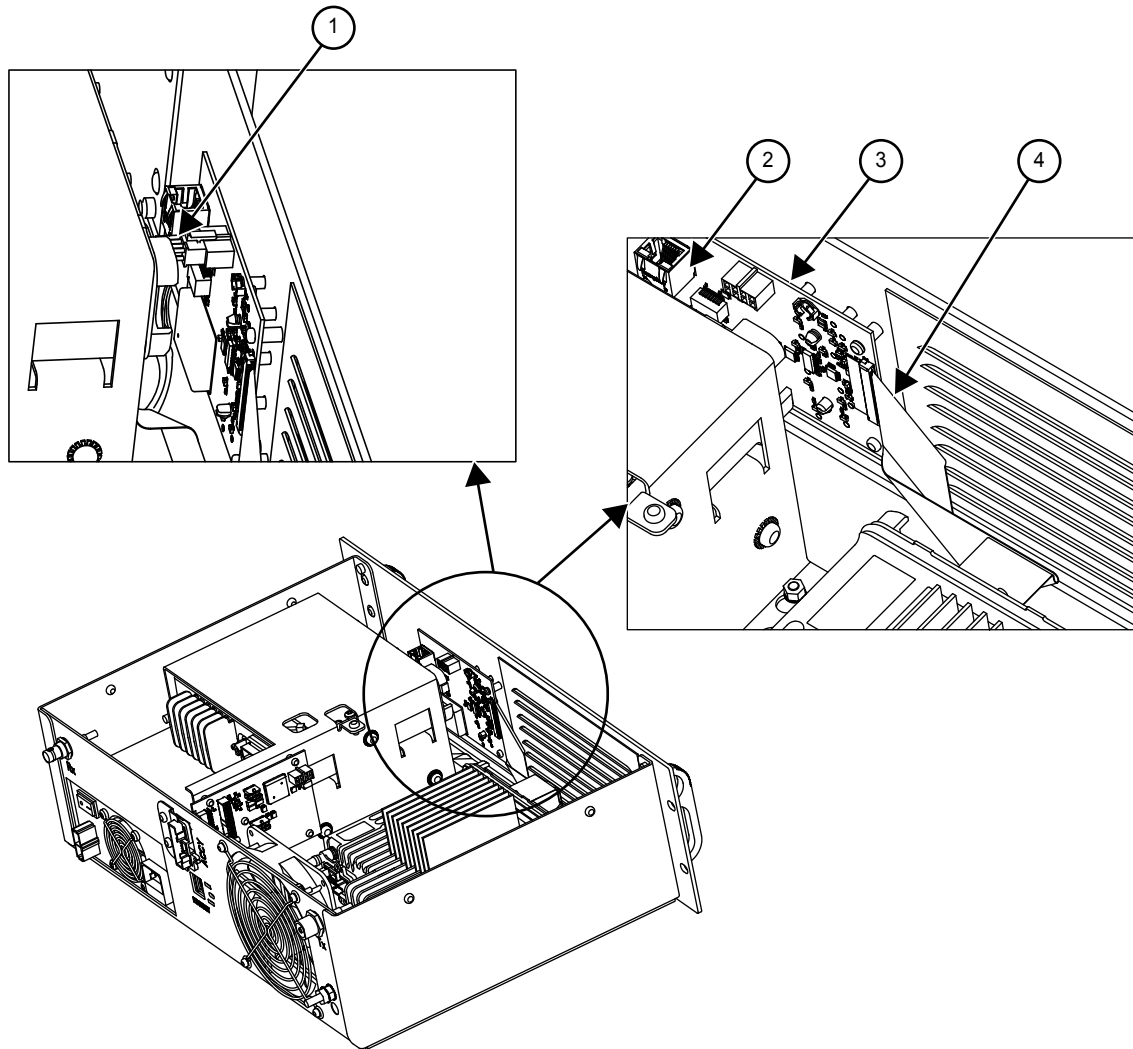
Disconnecting Ethernet Cable and Flex Cable
